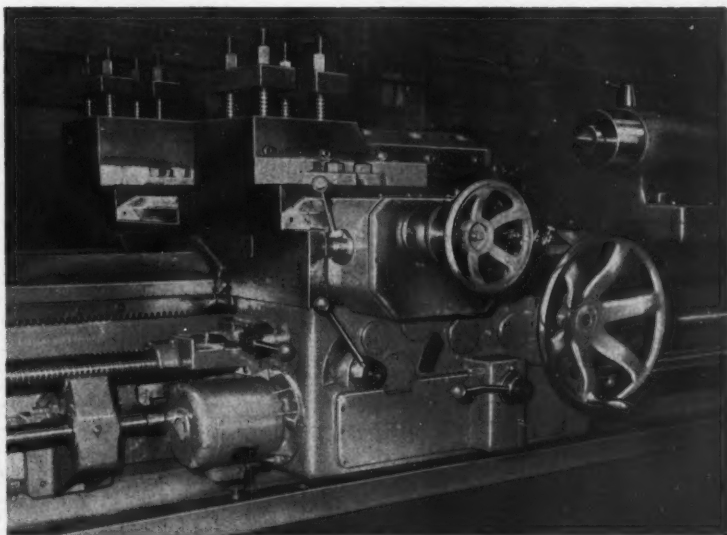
A close-up view of one of the saddles on the Granor 17-in., heavy-duty lathe
